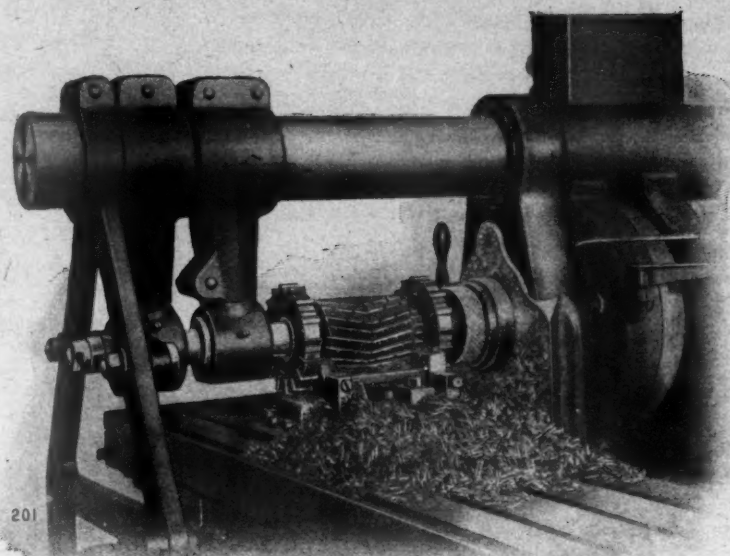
METHOD SUGGESTED FOR MILLING DRIVING BOX SHOES.
